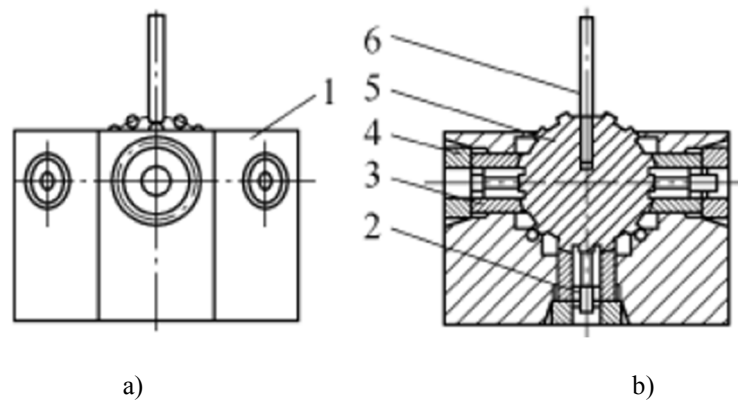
A spherical stepper motor-like joint: a) joint appearance; b) stator-rotor structure [101].
